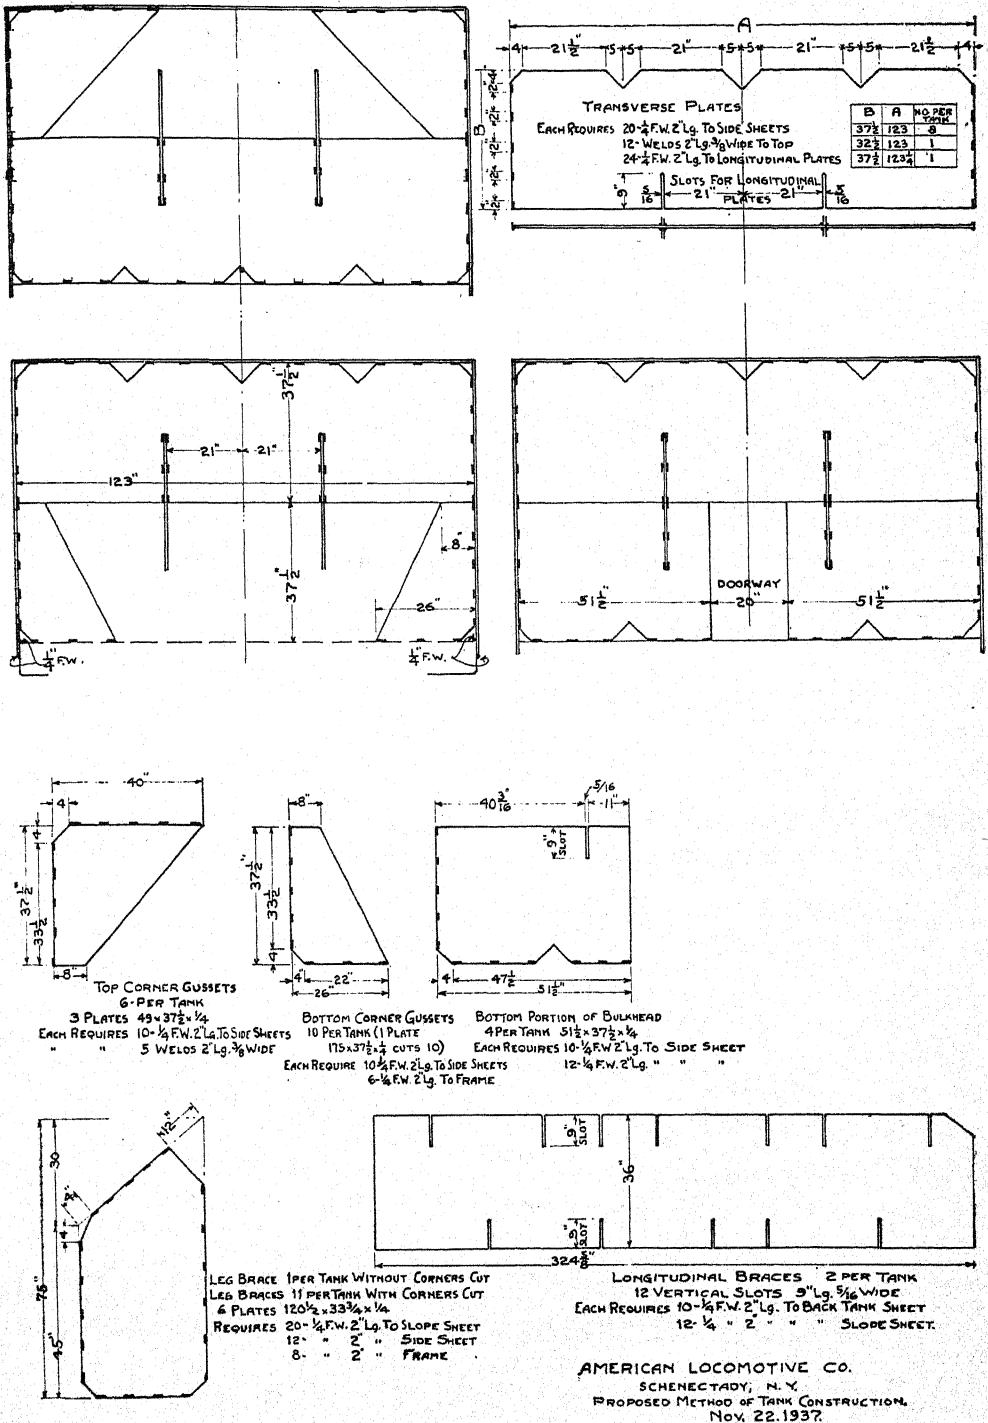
Details of arc welded tender tank having egg-crate baffle construction.
